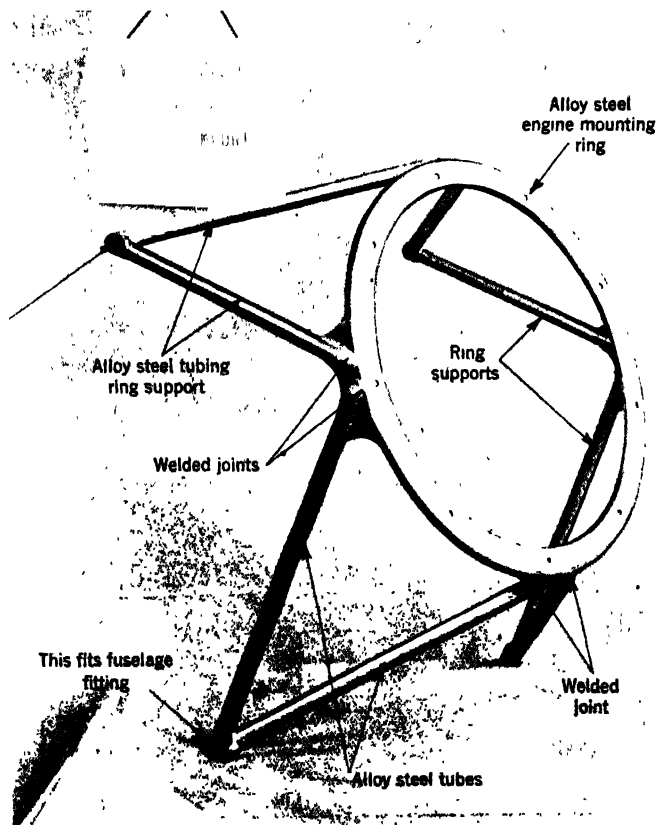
This Simple and Light Engine Mount is Strong Enough to Support the "Wasp" Engine Used on Vought "Corsair" Airplanes. It is Made of Alloy Steel Tubes Welded to an Alloy Steel Flanged Ring as Shown.
